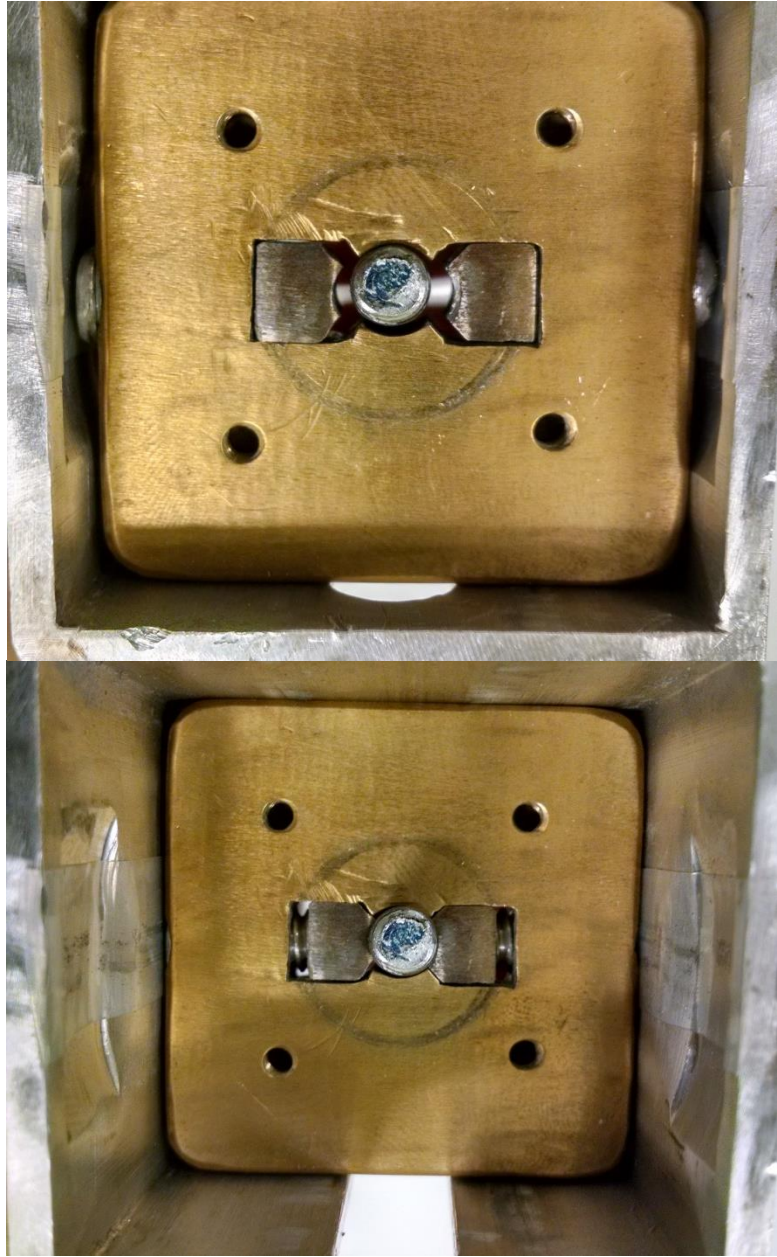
Disengaged (top) and engaged (bottom) ESM
